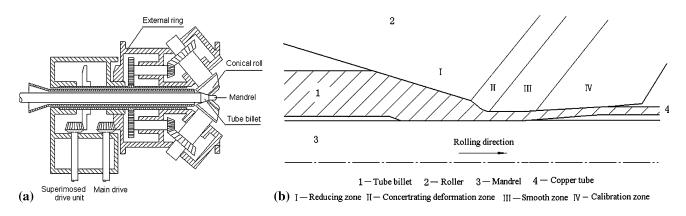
(a) Cross section of three-roll planetary mill and (b) magnified view of the deformation zones of roller
